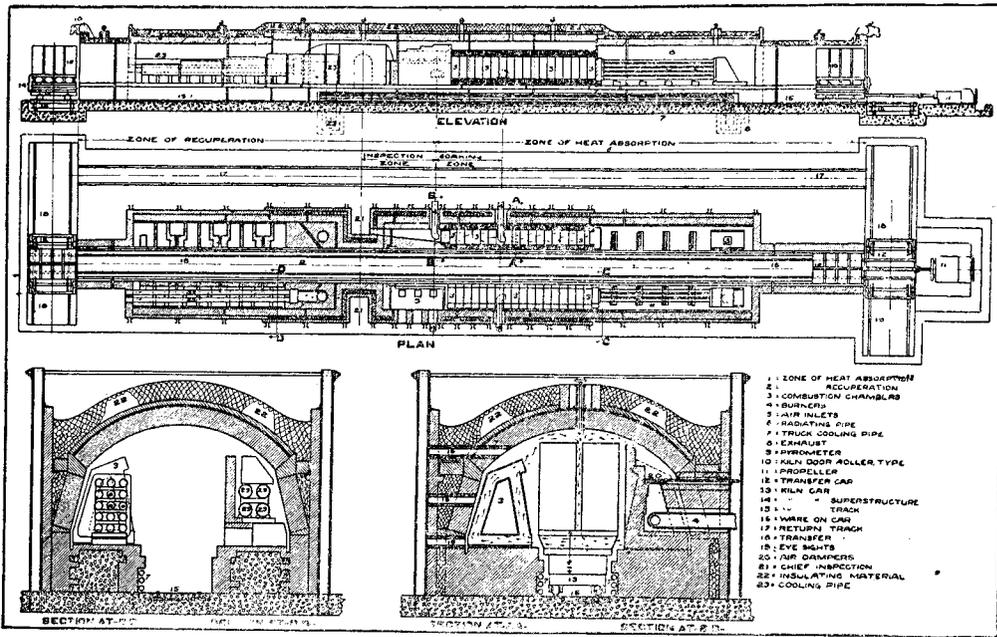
Two cross-sections and drawings of Dressler muffer type kiln. (From Brick and Clay Record.)
